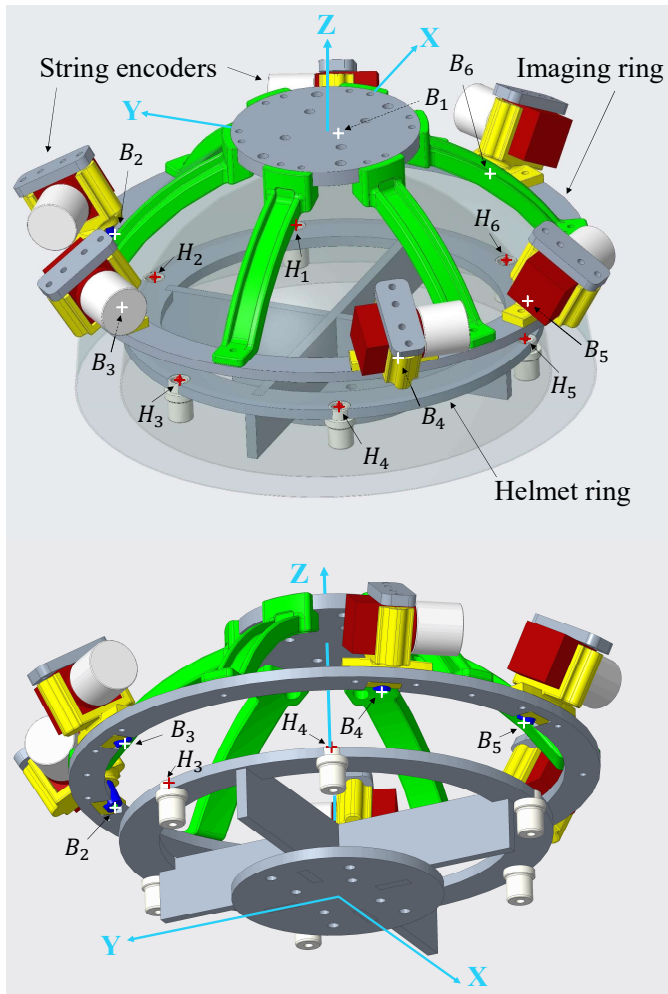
CAD model of string encoder system, with base (imaging ring) and helmet attachment points labeled
